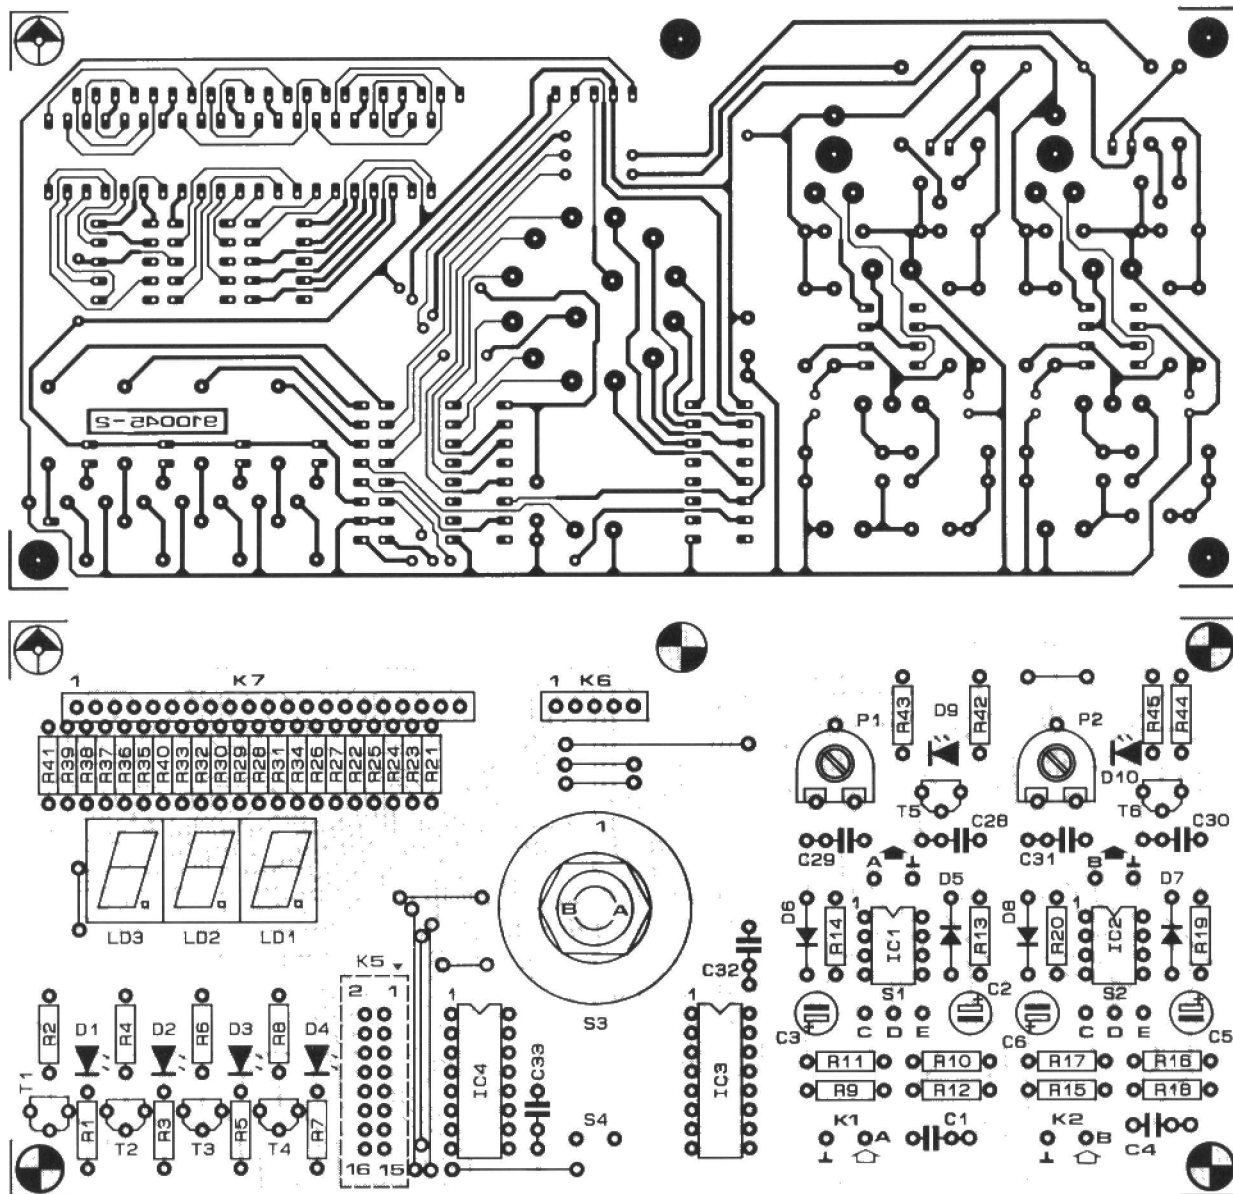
Printed-circuit board for the displays, input stages, and selector switches.
